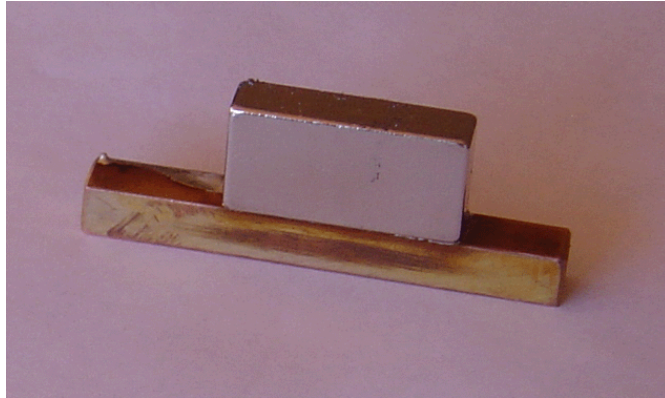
NdFeB 40SH permanent magnet blocks soldered to copper base.
